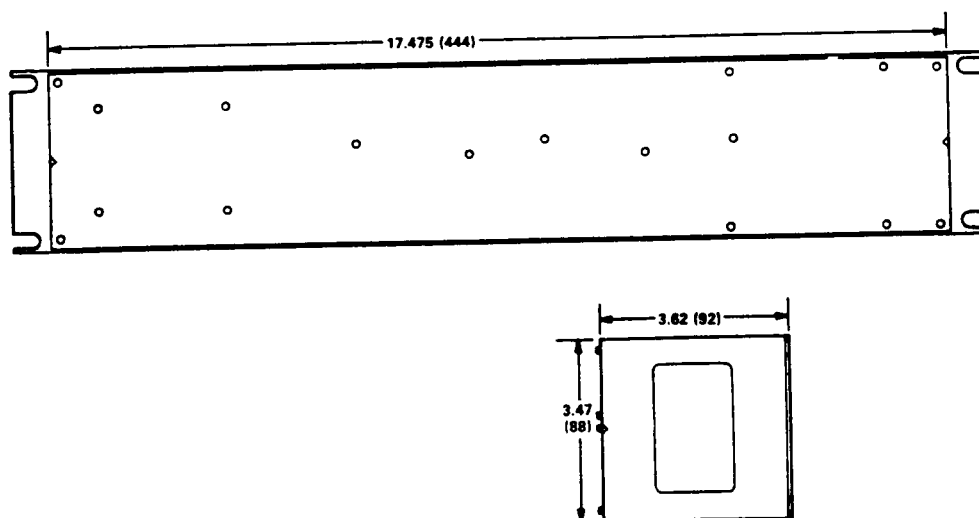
AC1363 Rack Mount Diagram (dimensions in inches and (mm))
